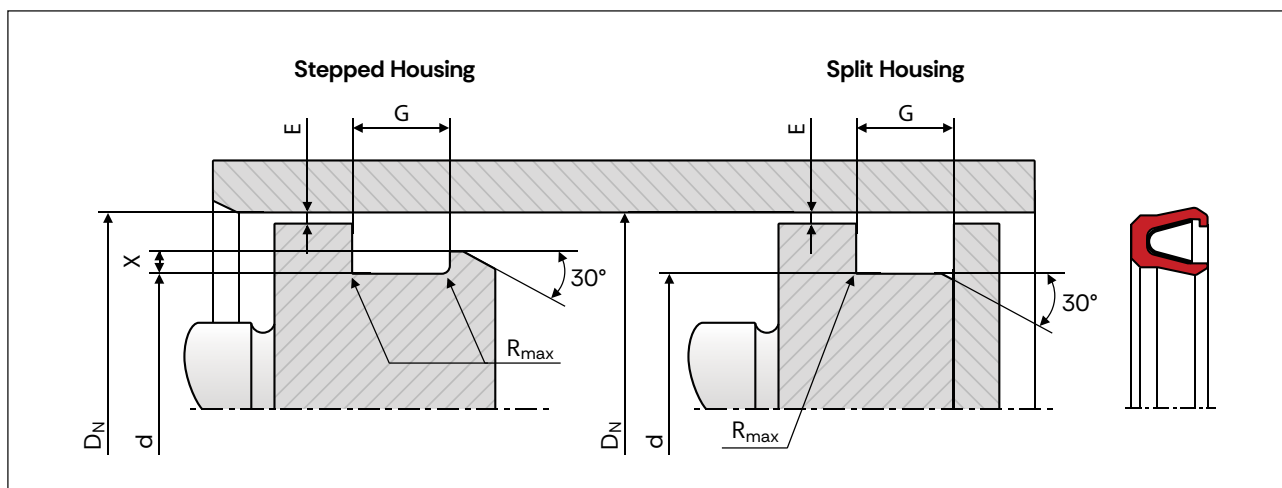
Assembly drawing for HaaSC Dynamic P33.
